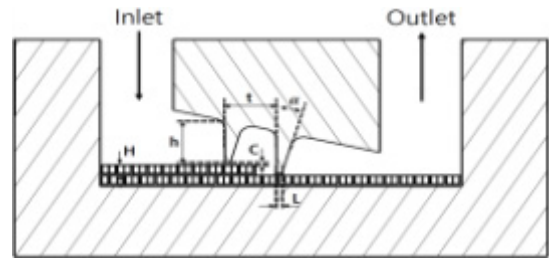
Schematic of stepped honeycomb labyrinth seal
